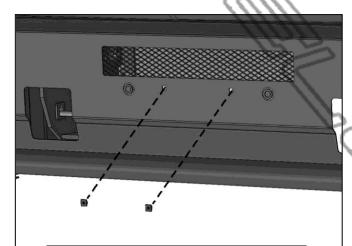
Reuse factory tow hook bolt to attach tow hook to bottom of Bracket
